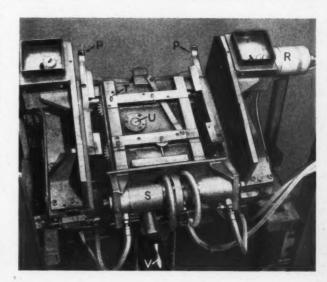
Close-up view of the body spotwelding fixture showing the locations, and the air cylinders provided for clamping the side shields in position
